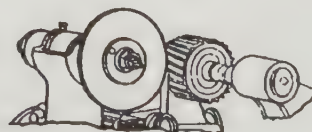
Grinding Spiral Mill Showing Finger Stop.
